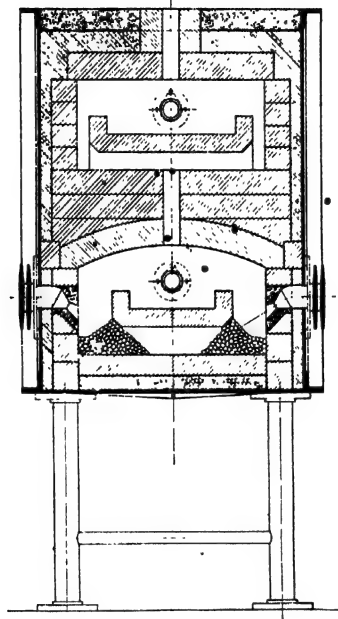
HIGH-SPEED TOOL FURNACE (BRITISH FURNACES LTD.).
